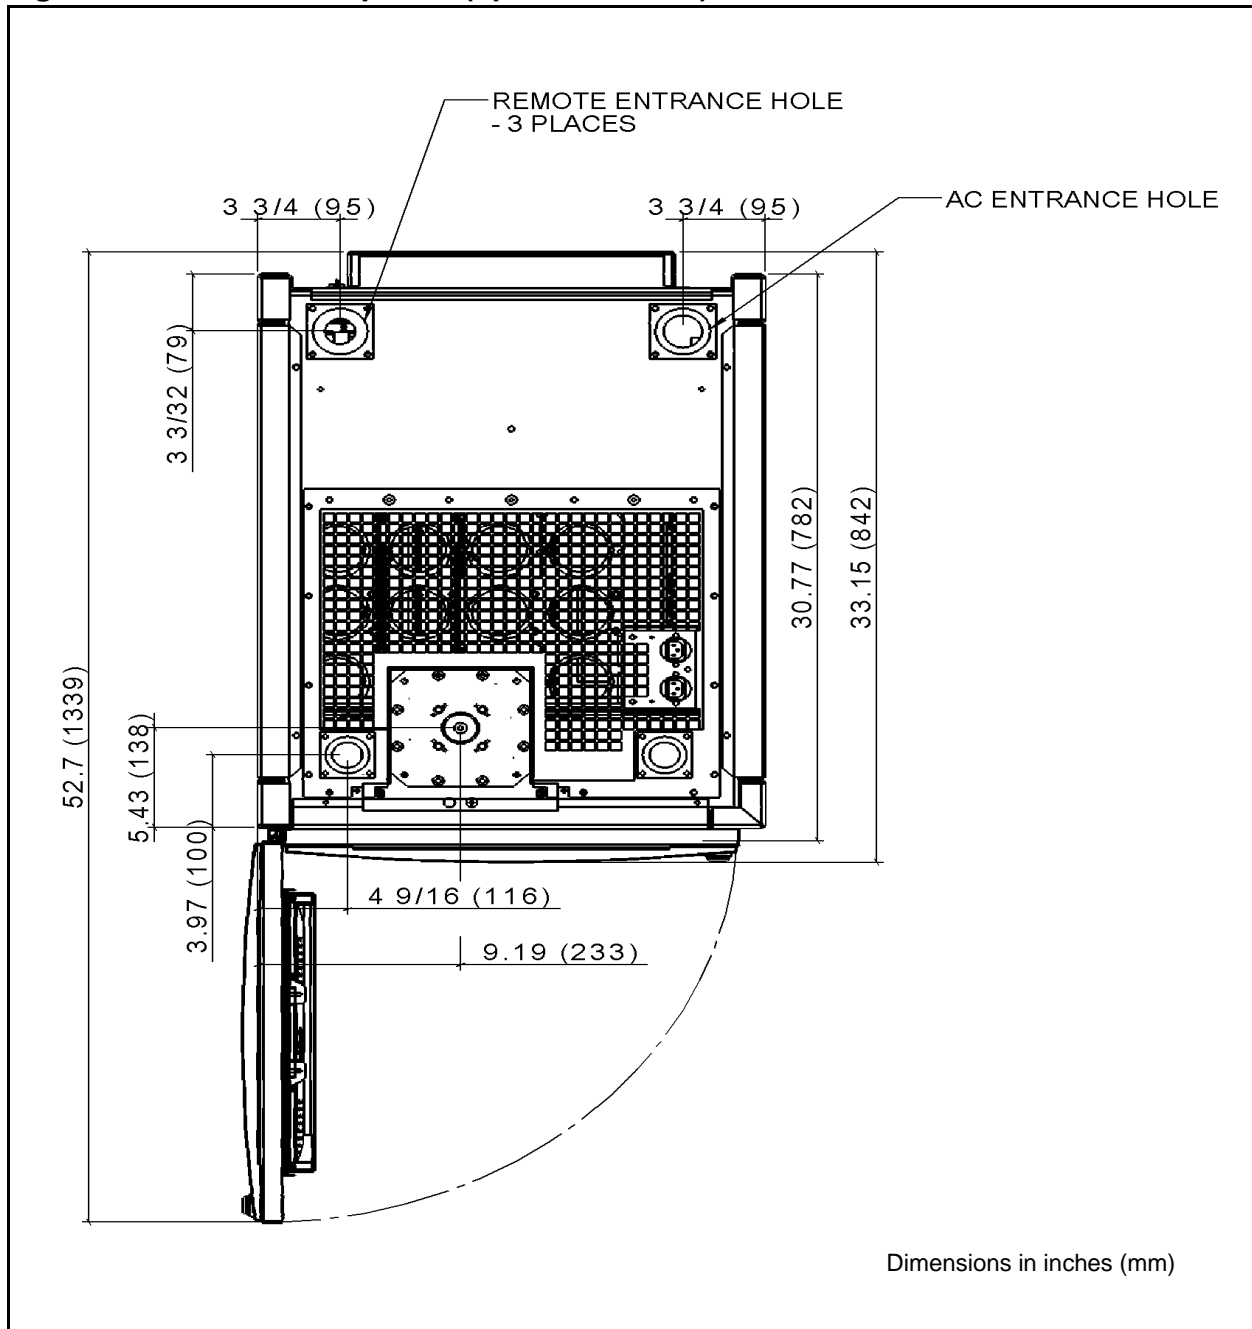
NV5/NV3.5 top view (exhaust dimensions)
